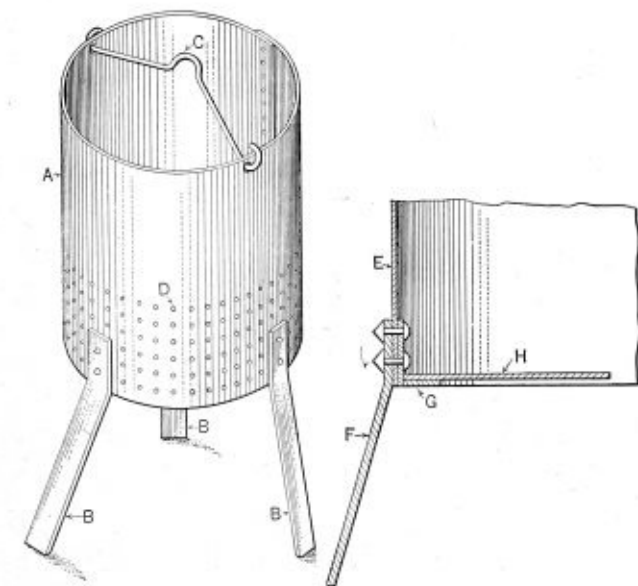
Boiler Shop Heater Fig. 2.—Detail of Leg Connections
